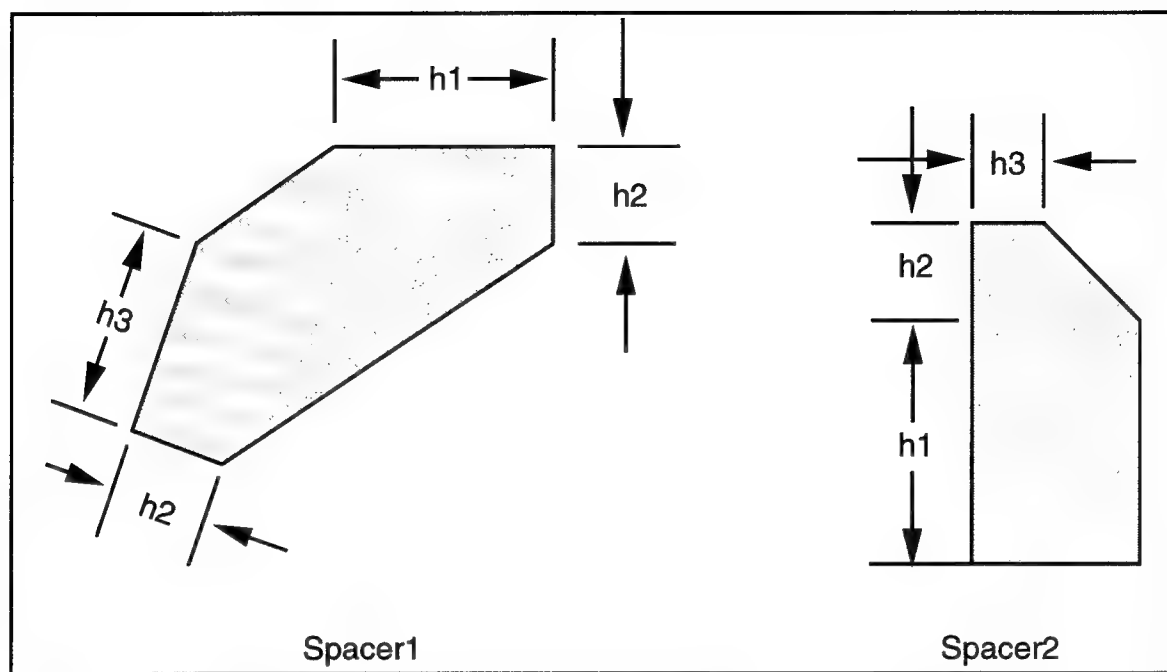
Mechanical Drawing of Optical Breadboard Design.
